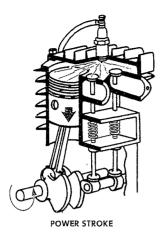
The mixture is burned, pushing the piston down for the power stroke. (Briggs & Stratton Corp.)
